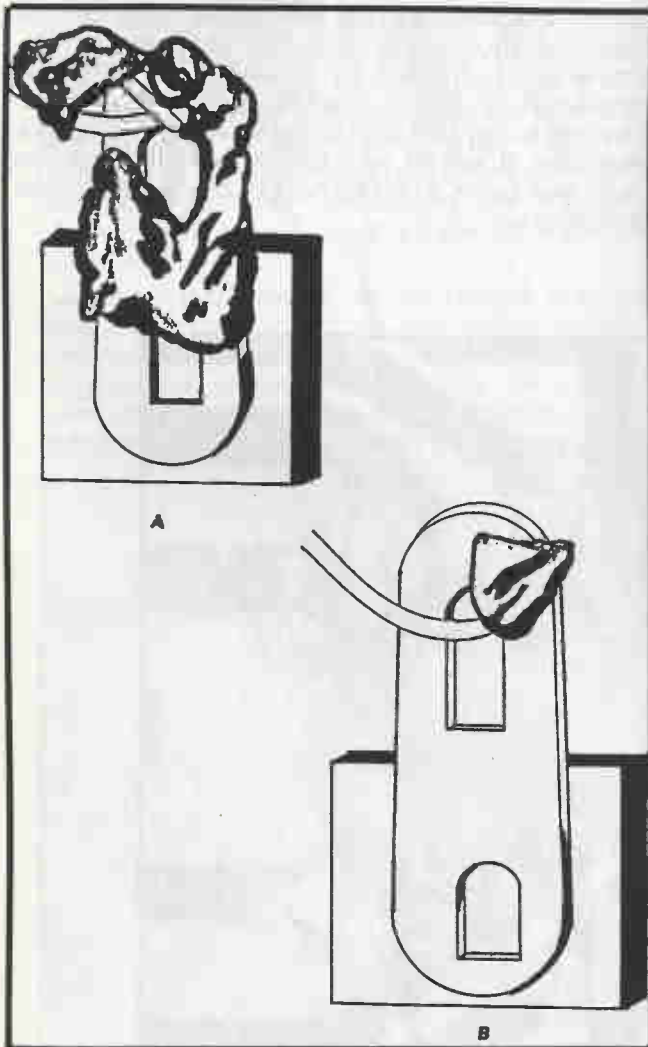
When you have completed soldering a connection, inspect the joints. (A) illustrates a "cold solder" joint. Note that it is rough and dull. (B) illustrates a correctly soldered joint. It is smooth and shiny.
